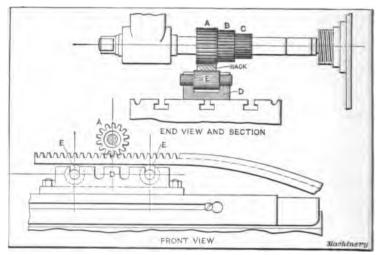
Straightening Cold-rolled Steel Racks in a Milling Machine
